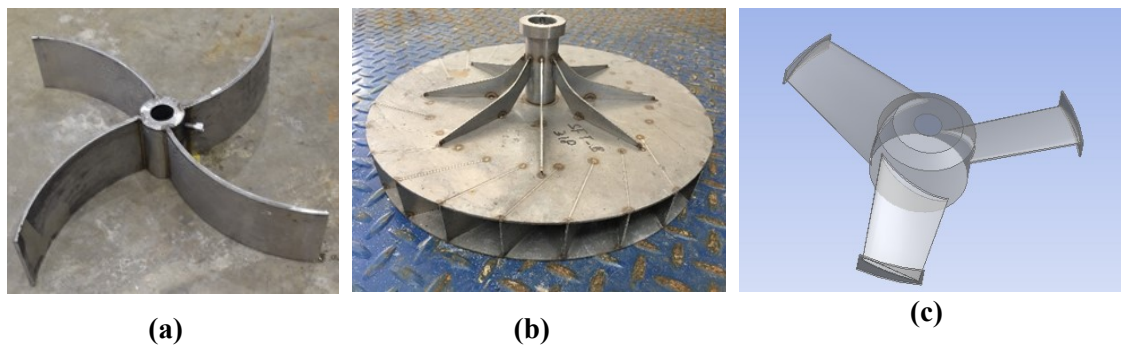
3D images showing the structure of different impellers: (a) SWIRLFLOW® SF-C1; (b) SWIRLFLOW® SF-A; (c) draft tube Airfoil C200 impeller.
